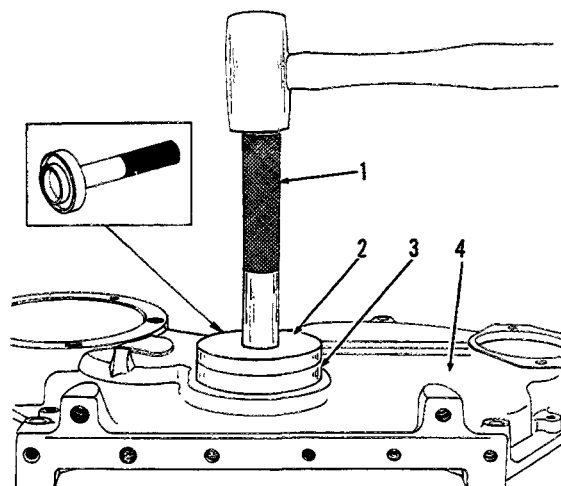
INSTALLING CRANKSHAFT FRONT OIL SEAL (T-52154)
